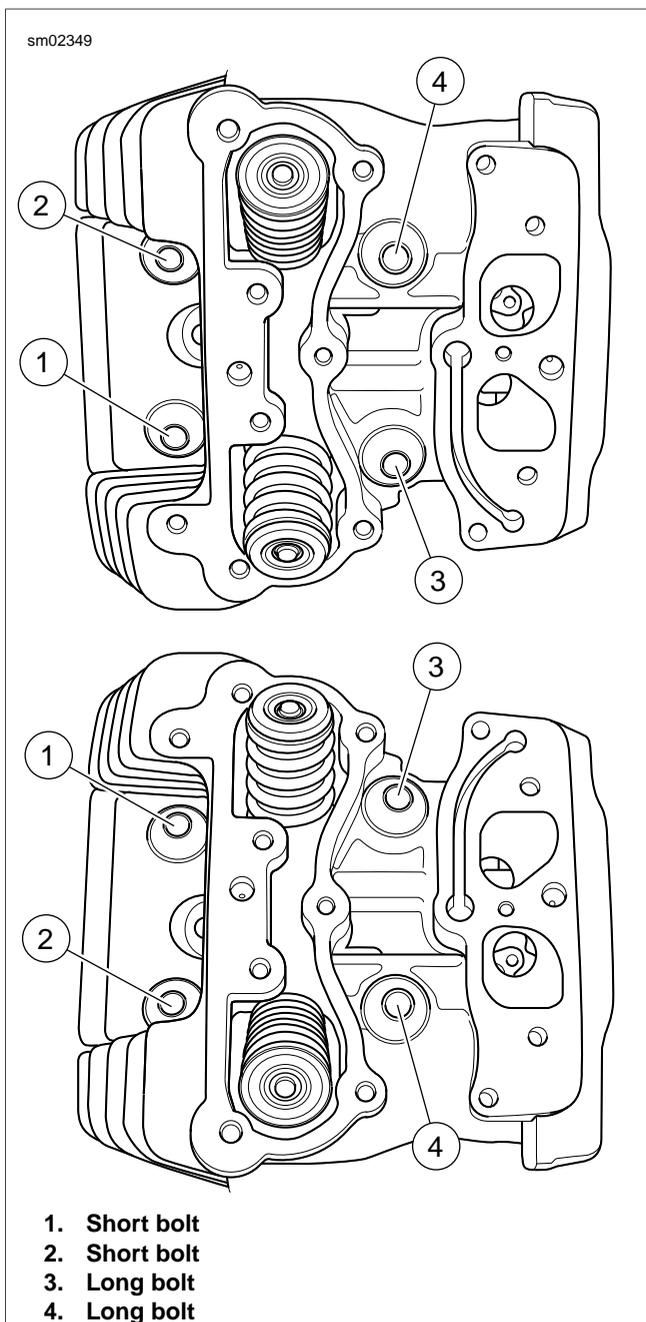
Cylinder Head Bolt Torque Sequence (Top: Front Cylinder Head, Bottom: Rear Cylinder Head)
